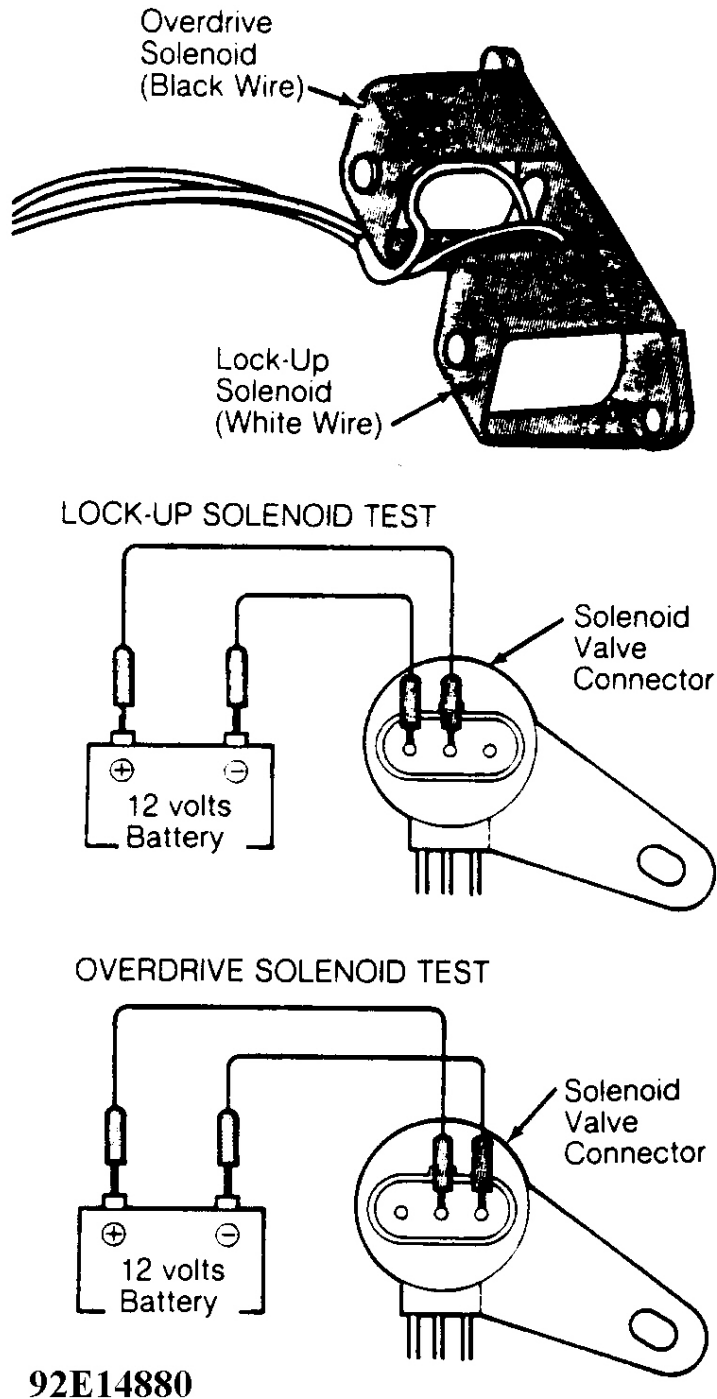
Checking Overdrive & Lock-Up Solenoids
